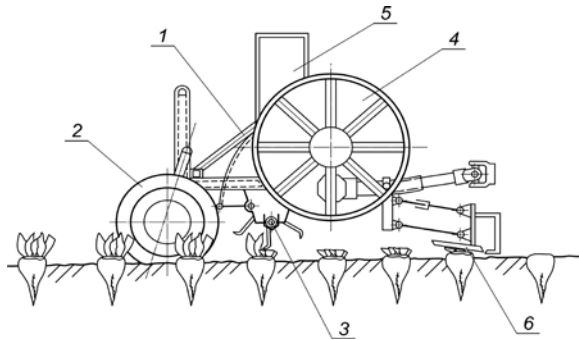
Structural and flowsheet 1 - frame; 2 - Pneumatic copying wheels; 3 - sebaceous hychkorizalny rotary machine; 4 - screw conveyor and blade shpurlyalka; 5 - boot pipe; 6 - doobrizuvach heads roots.
